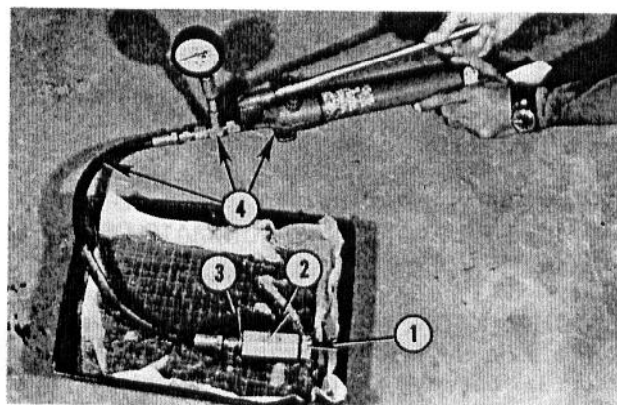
Checking Circuit Relief Opening Pressure with Hand Pump
